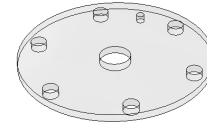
The supply channel layer of seal module is the only part made of 2 mm acrylic sheet.
